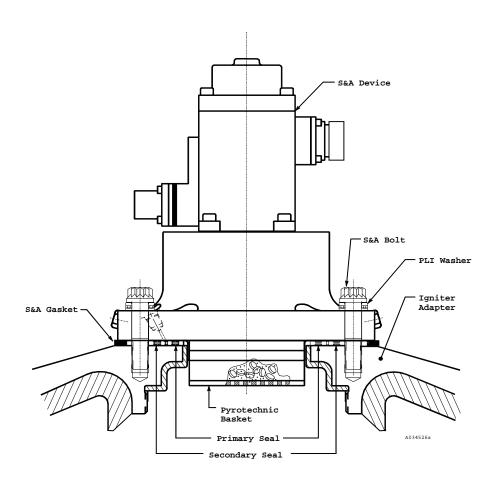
Safety and Arming Device-to-Igniter Adapter Joint
